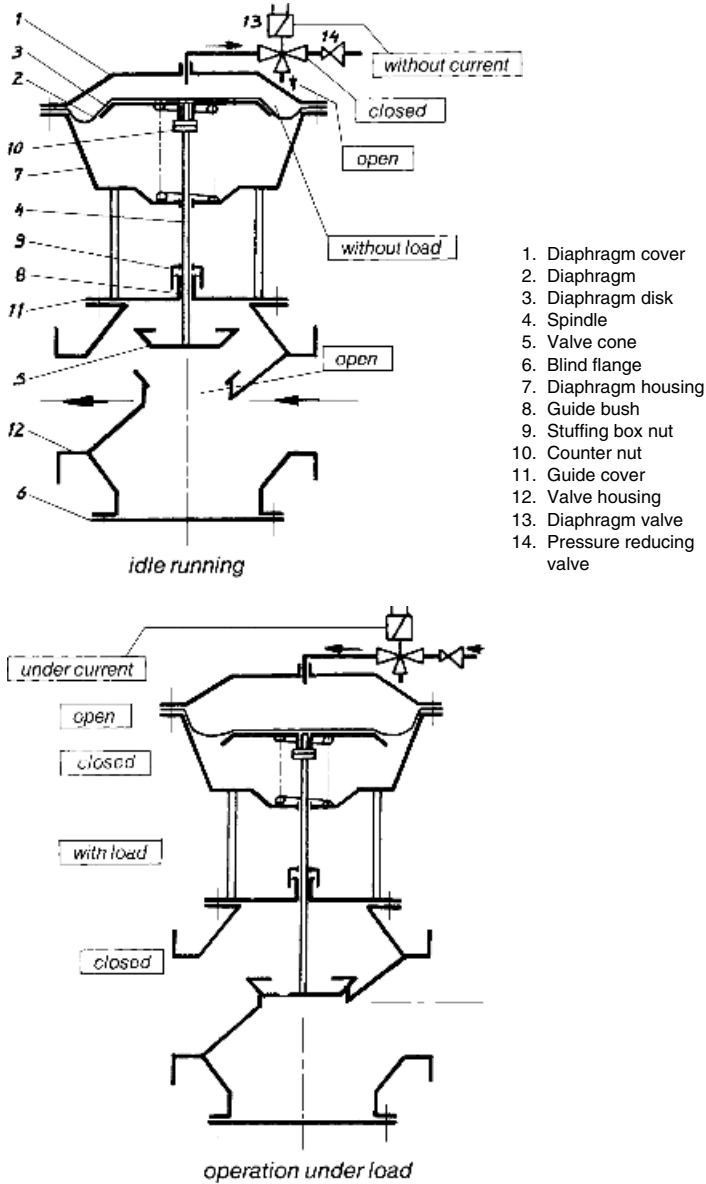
Diaphragm valve associated with constant-speed unloading devices in rotary screw compressors. (Aerzen USA Company, Coatesville, Pa.)
